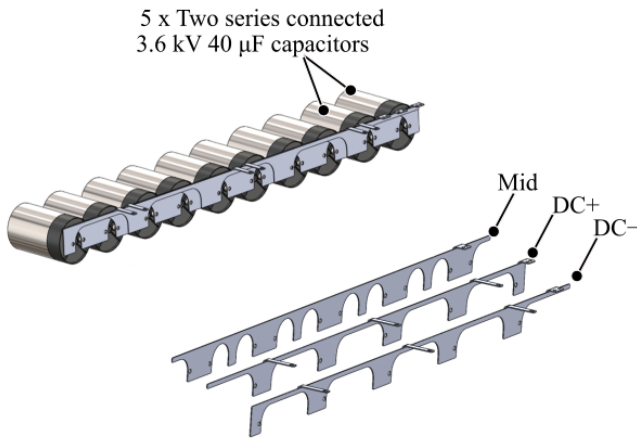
3D-CAD model of the DC-link capacitors and busbar assembly.
